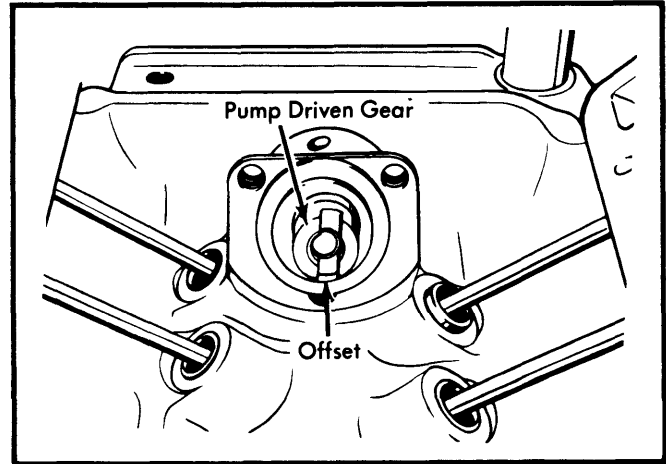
View of Offset on Pump Driven Gear (Shown with Intake Removed)
